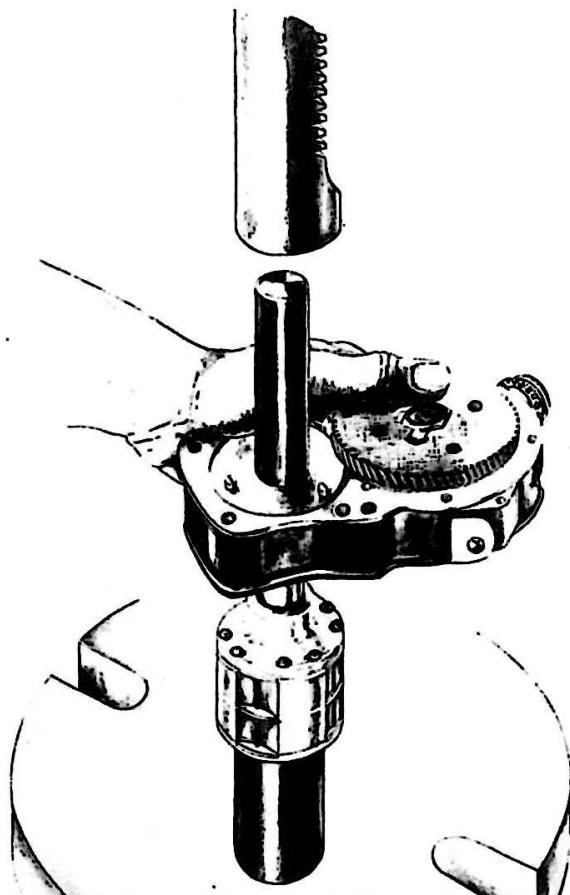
Pressing Front End Plate onto the Rotating Magnet.
